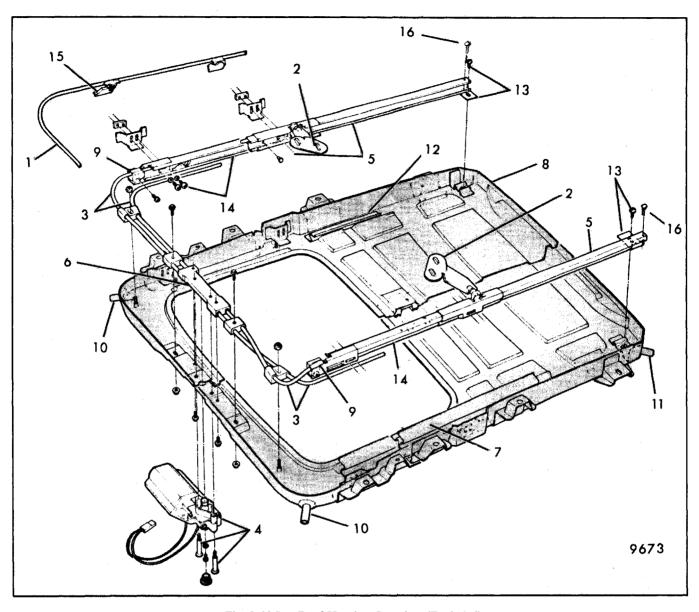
Sun Roof Housing Complete (Exploded)
